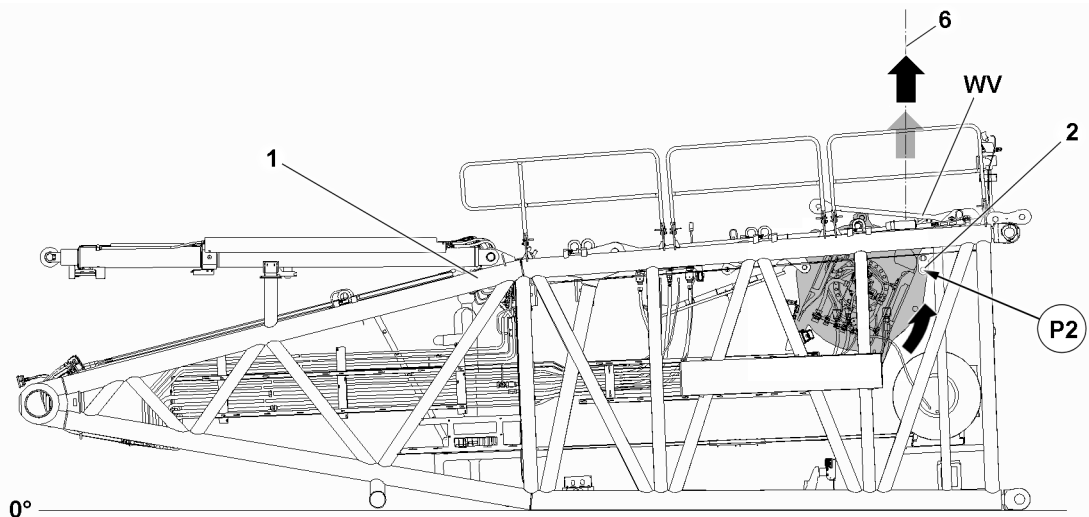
Fastening winch 5 WV to the auxiliary crane and unpinning
